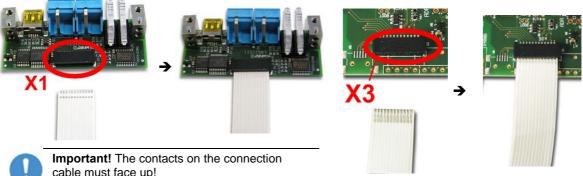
Connecting the CANopen Assembly Interface (AIFX-CO) to the Basic Card 104C-FB-R\F (Example)
